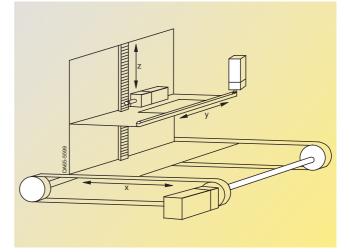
/7 Line drawing of a three-axis conveyor vehicle
